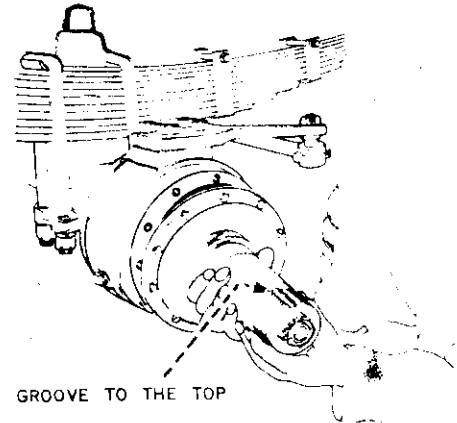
ASSEMBLY OF STUB AXLE ON TRACTA HOUSING
